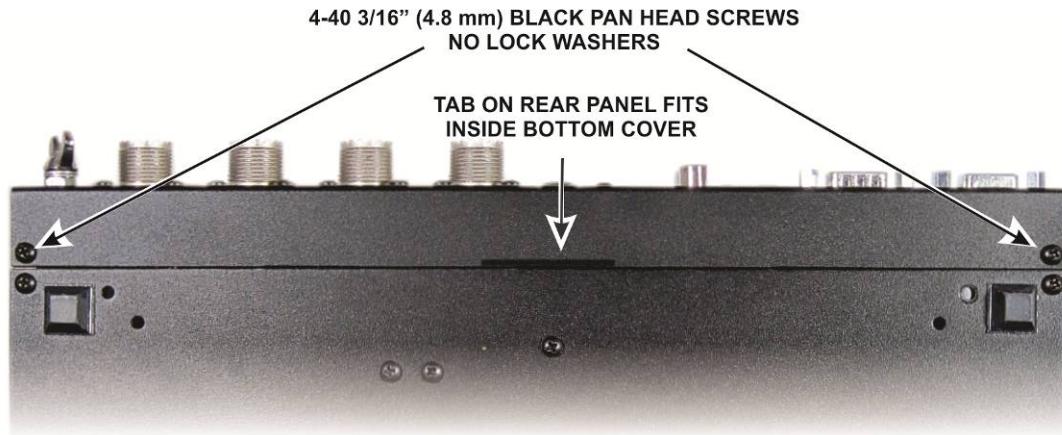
Installing Screws in Rear Panel Bottom Lip.
